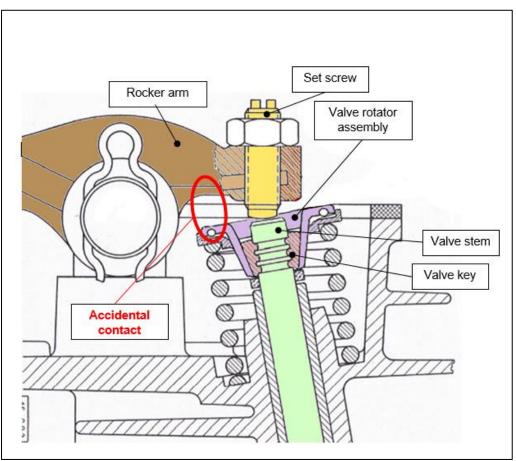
components of the valve train showing the location of unwanted contacts between the rotator and the rocker arm
